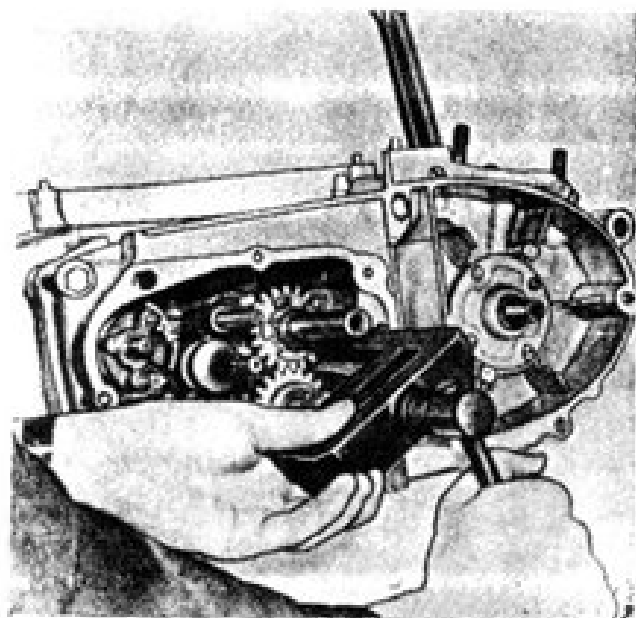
Layshaft pressing-out, HЖ-П-3 motorcycle.
